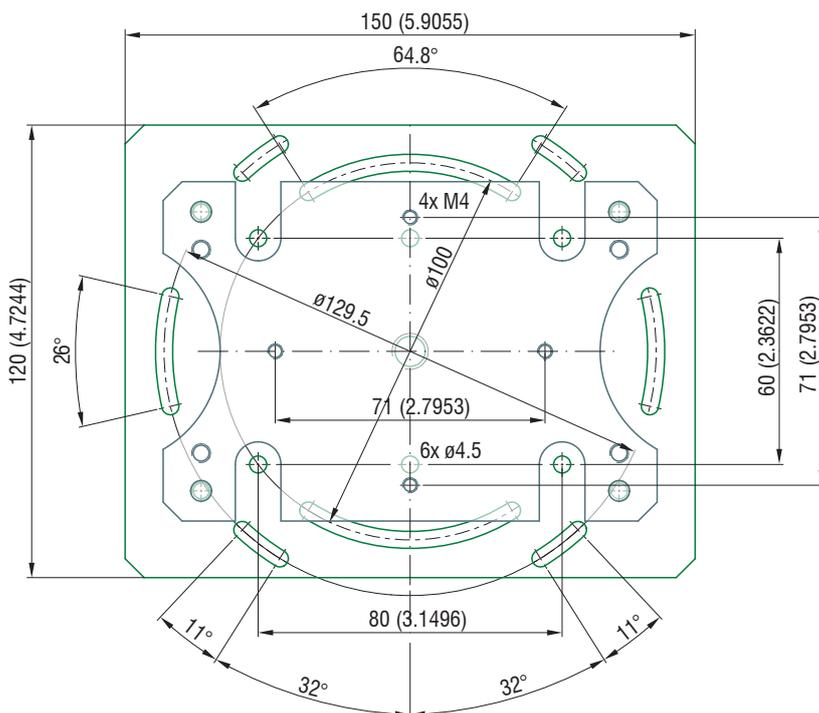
Dimensional drawing mounting plate ILR-MP3800, dimensions in mm (inches, rounded off)
